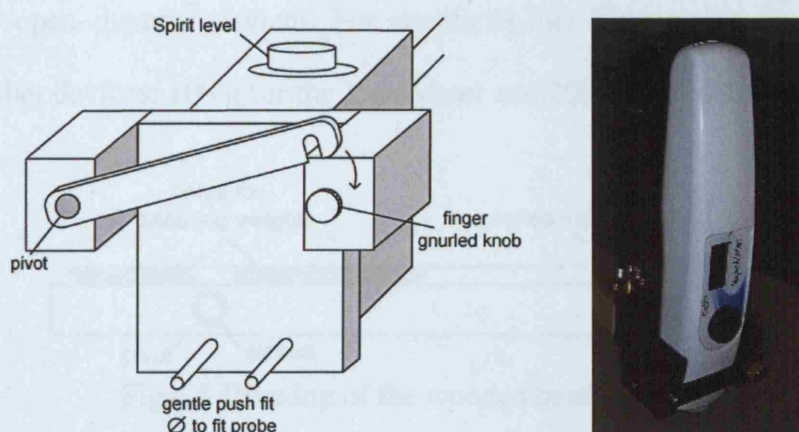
Drawing and picture of the probe holder for the VapoMeter.
